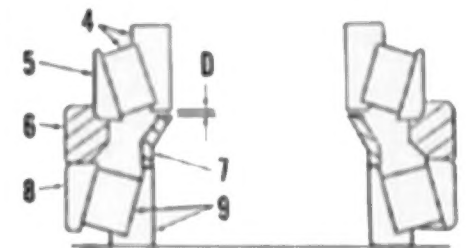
Stack outer axle bearings and spacers as shown and measure distance (D) to determine shim pack for bearing adjustment.
